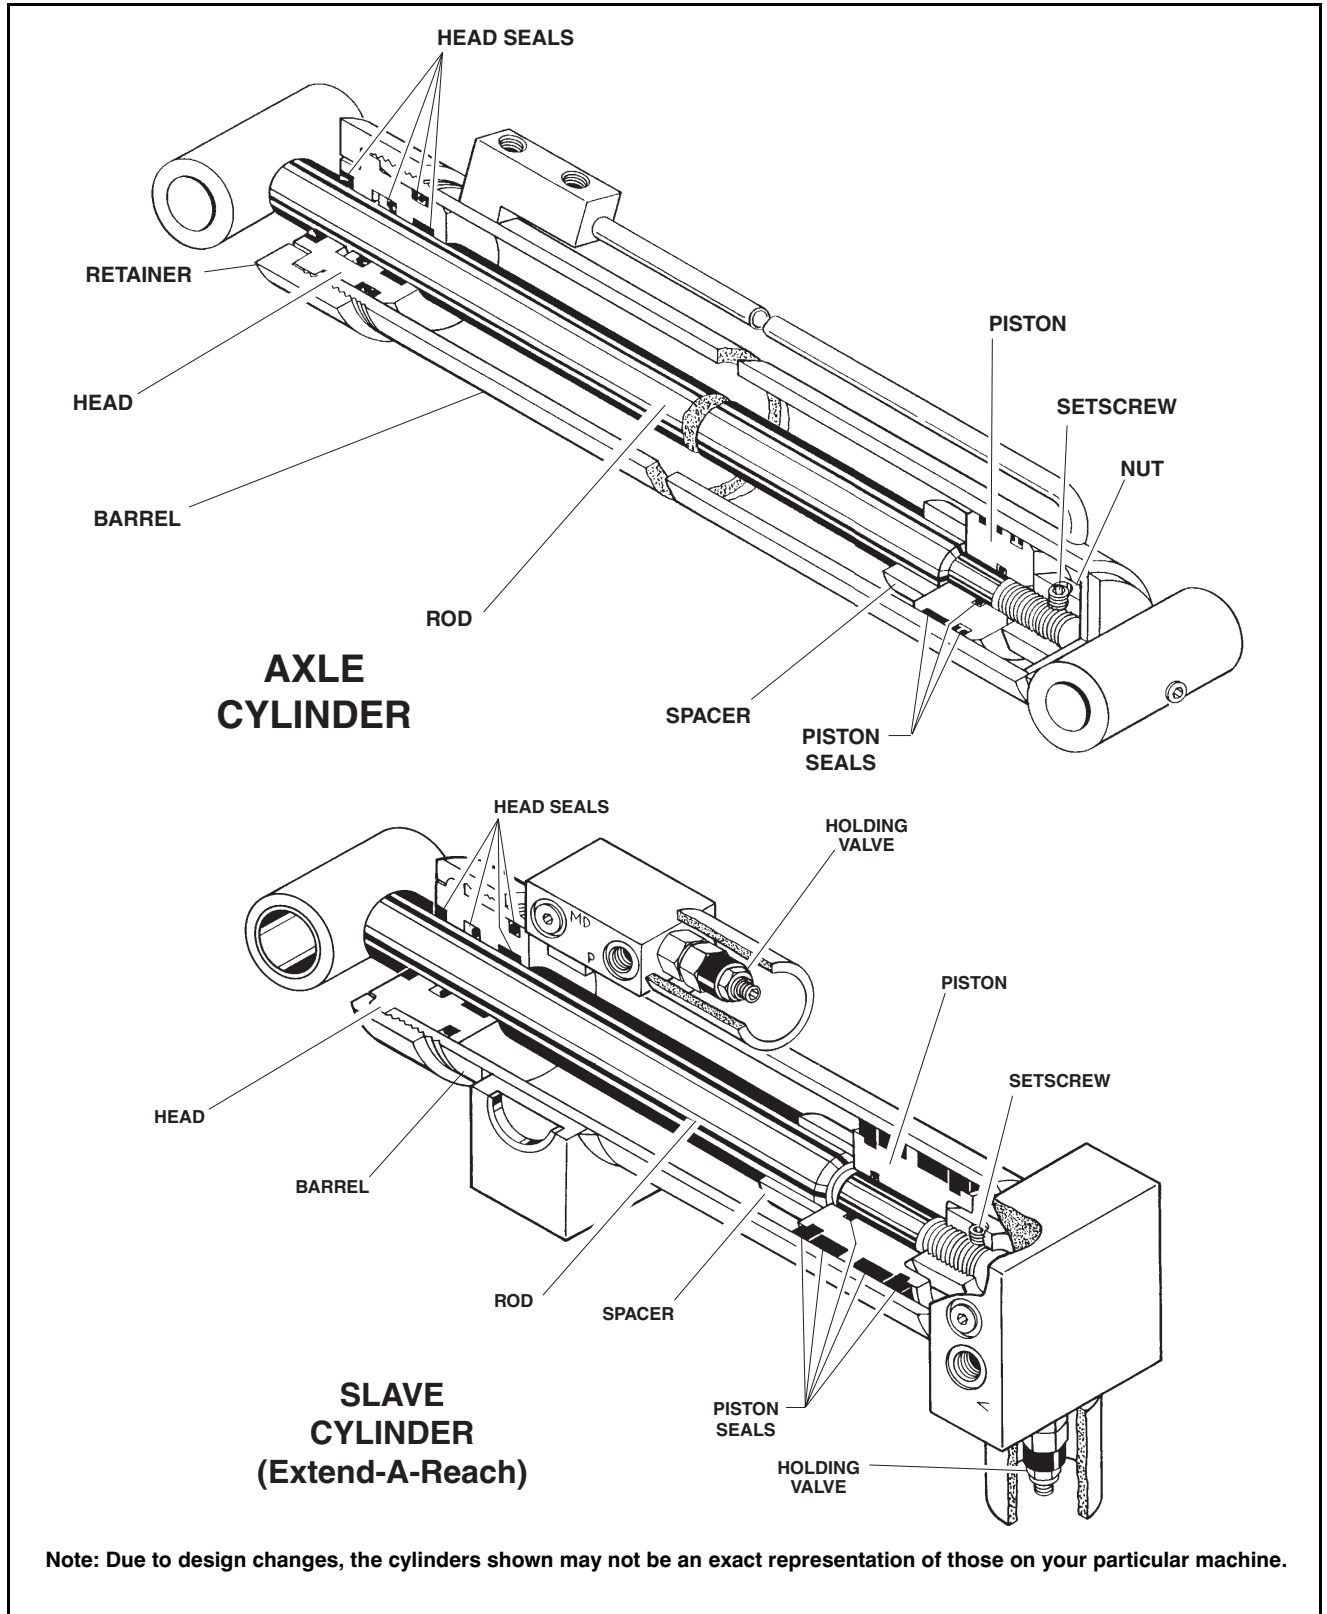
Typical Hydraulic Cylinders - Sheet 4 of 5
